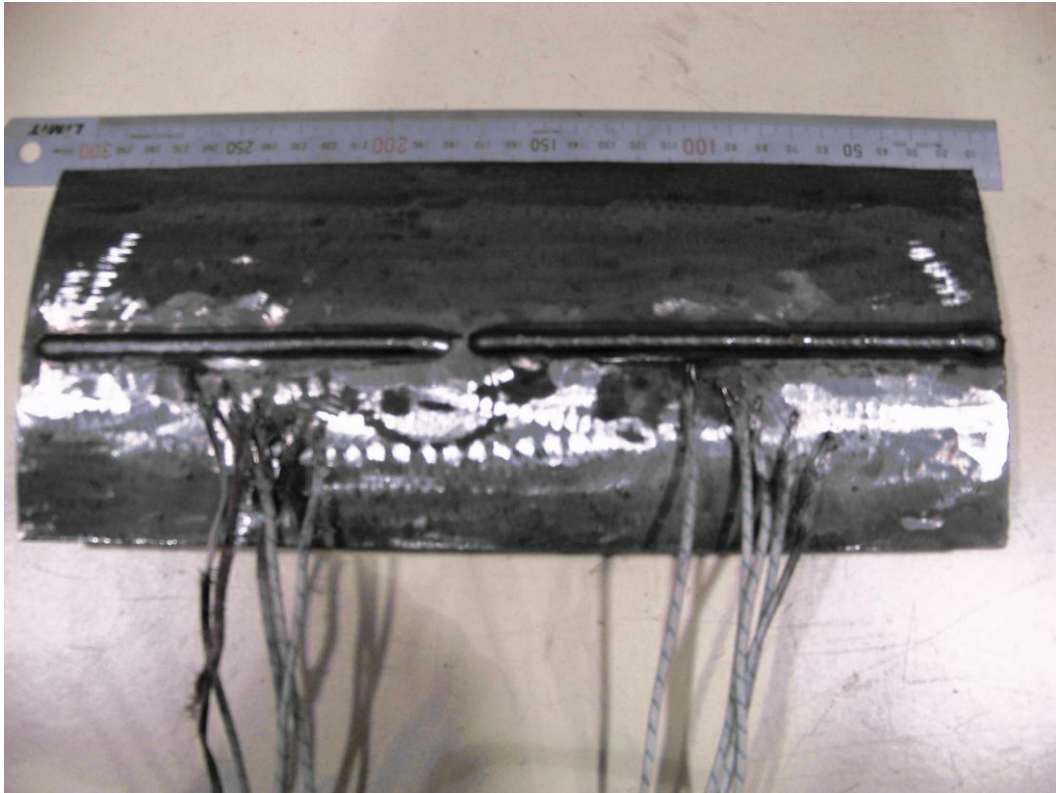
K-type thermocouple position on a welded specimen
